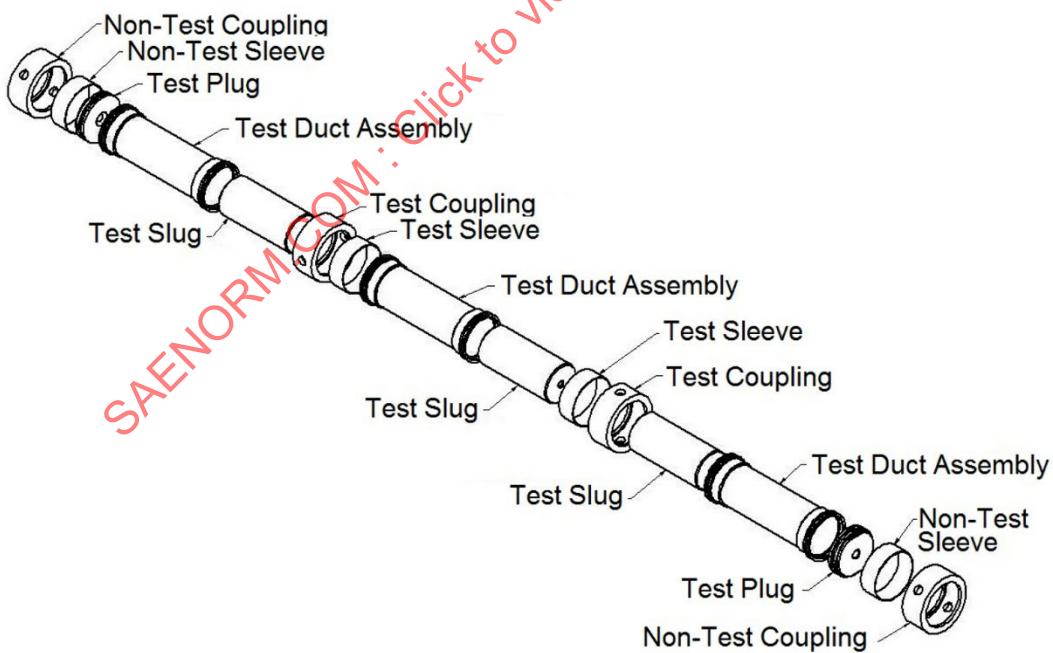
Life cycle configuration (a) complete test assembly (as assembled and exploded views)
